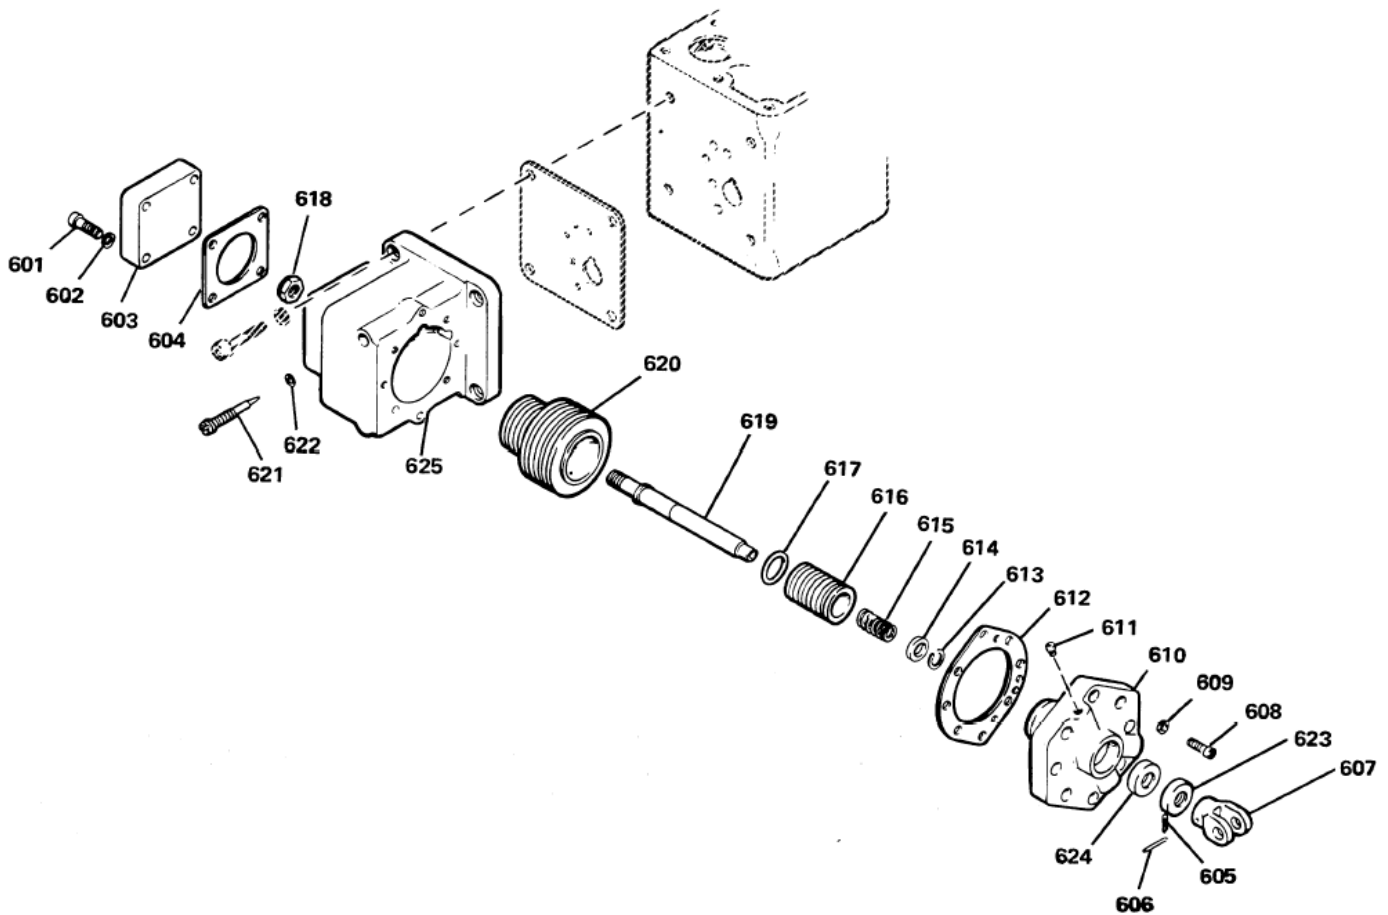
Exploded View of 29 ft-lb (39 J) Differential Power Cylinder
